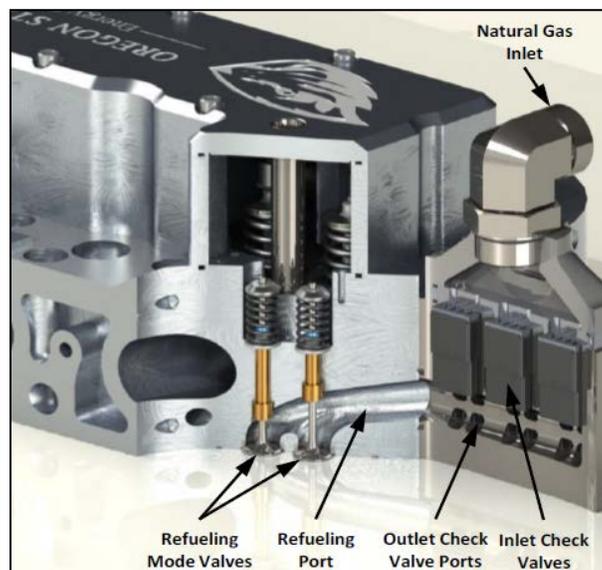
CAD drawing of the modified cylinder head from an earlier version of the onboard refueling setup (*rendering courtesy of Czero*).
